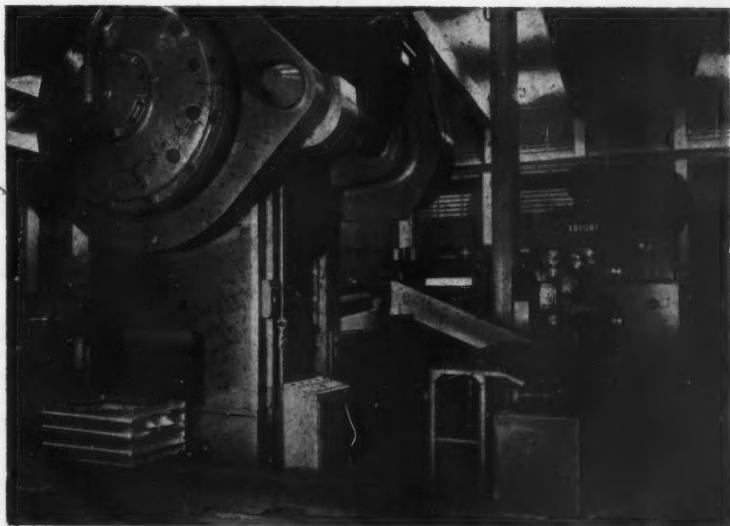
On this automatic line for the production of pipe flange forgings, billets are cropped from the bar on the machine at the right, fed into an induction-heating furnace, and forged to shape in two stages on the press at the left
